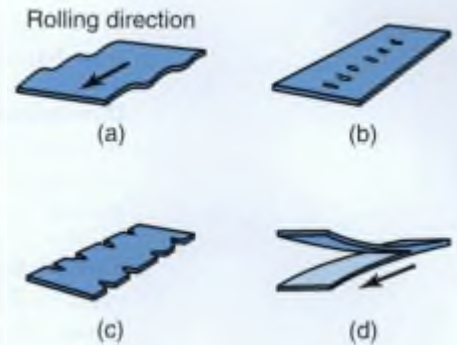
Schematic illustration of typical defects in flat rolling: (a) wavy edges; (b) zipper cracks in the center of the strip; (c) edge cracks; and (d) alligatoring.
